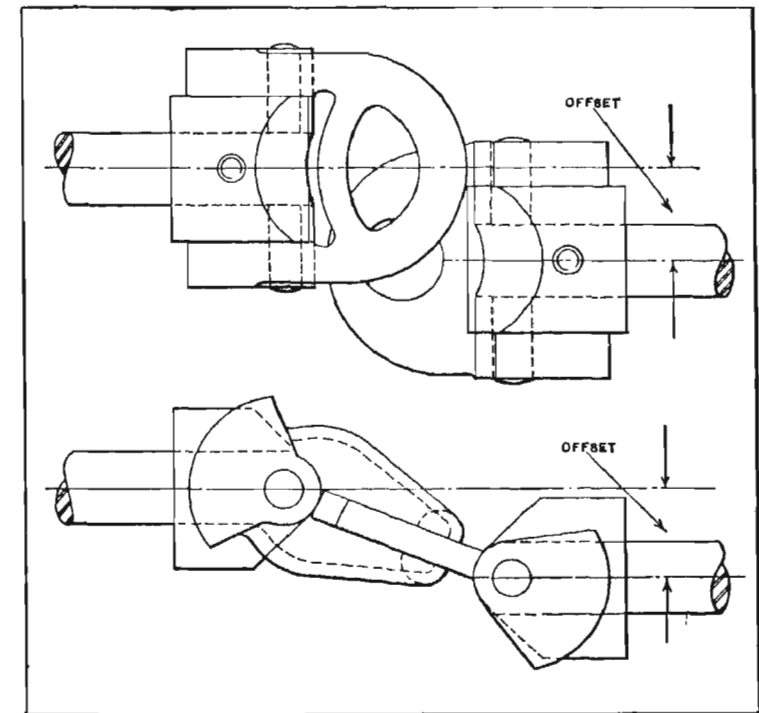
Diagrams Showing Drive Employed on Offset Shafts
